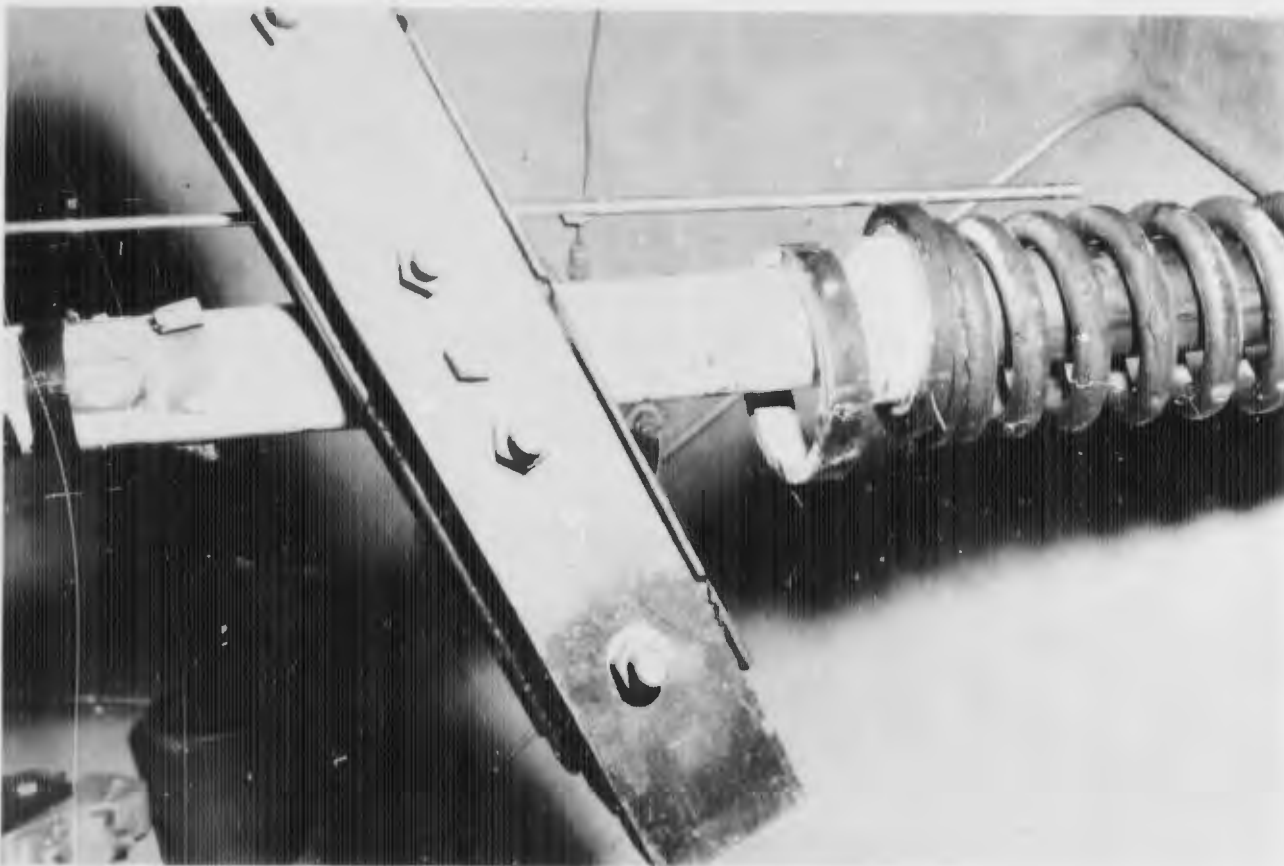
Typical Type I Failure--Cap Screw Shear Failure at Lower Can Stop
